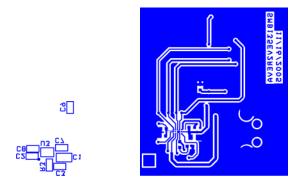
Example Layout. The bottom side layout provides space (U3) for a SMB135E device packaged in a CSP package.
